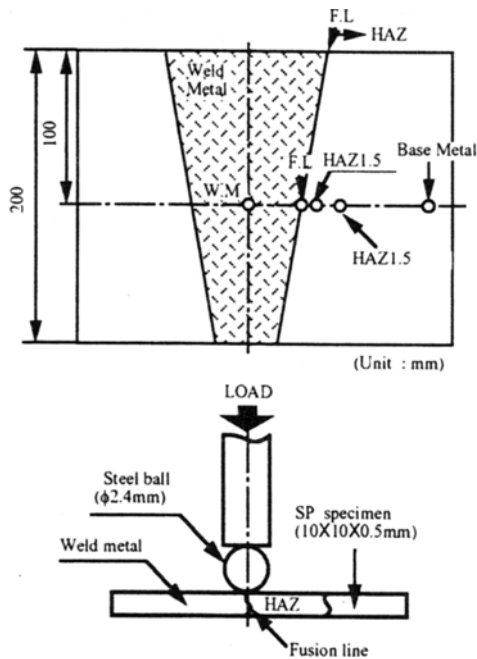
Schematic illustration showing the extracted position in weldments and loading method for SP specimen
